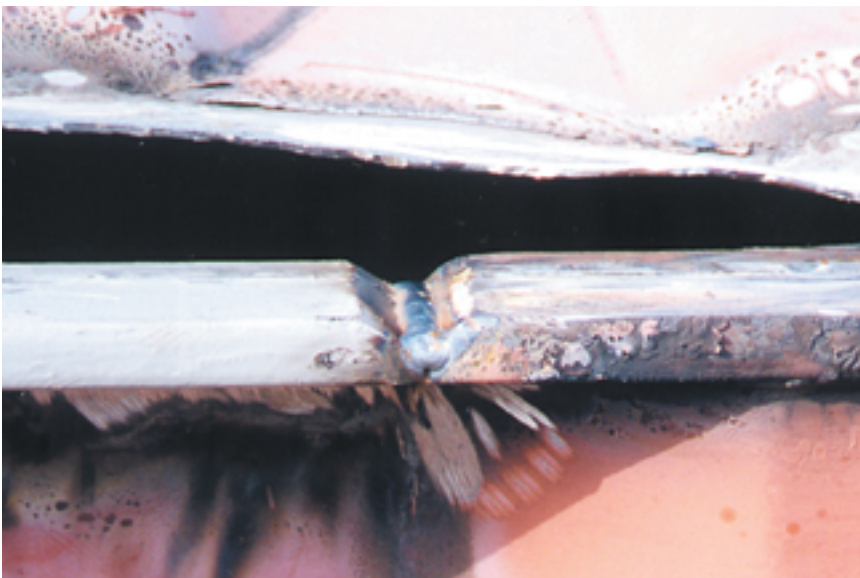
(to left) / Welding of flat-bar top side rail section to original rail (first pass)
